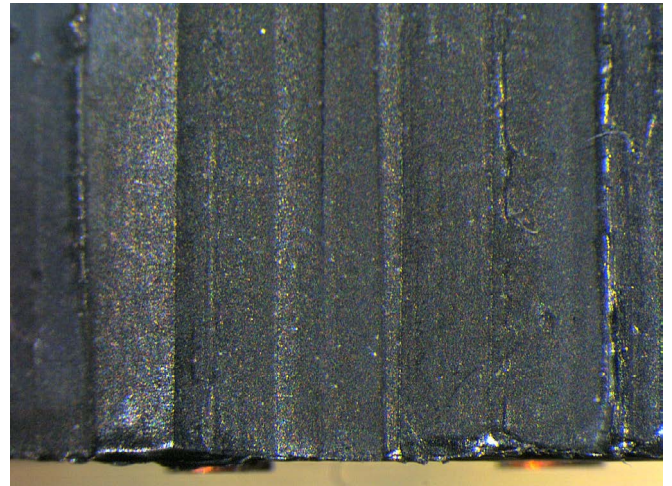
Brittle fracture zone on the EF fitting side of the weld at 16x magnification (bottom section of figure B.1).
